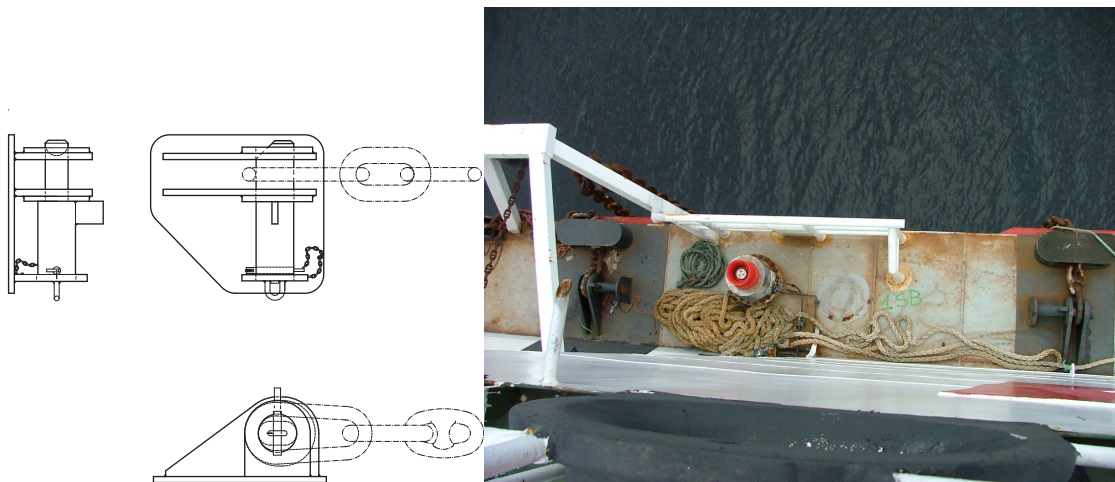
SMIT bracket detail and typical deck connection layout
